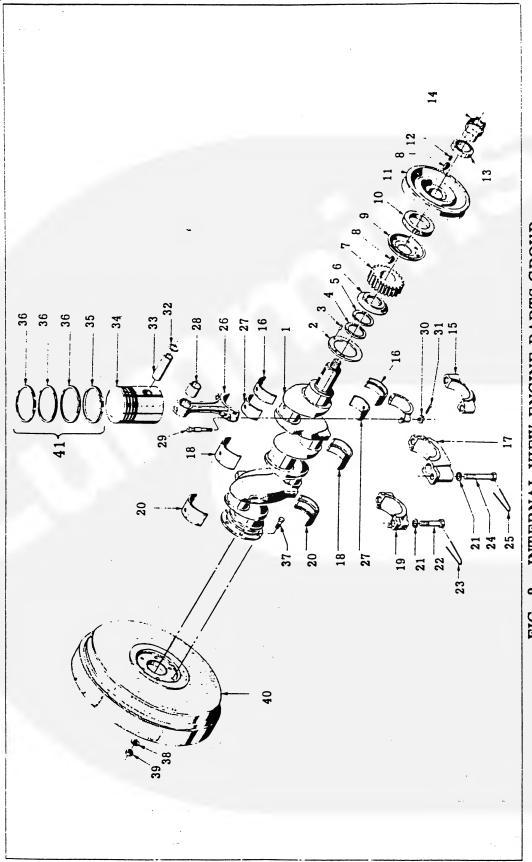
INTERNAL VIEW ENGINE PARTS GROUP
